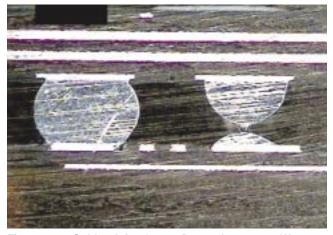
Solder Joint Opens Due to Interposer Warp
